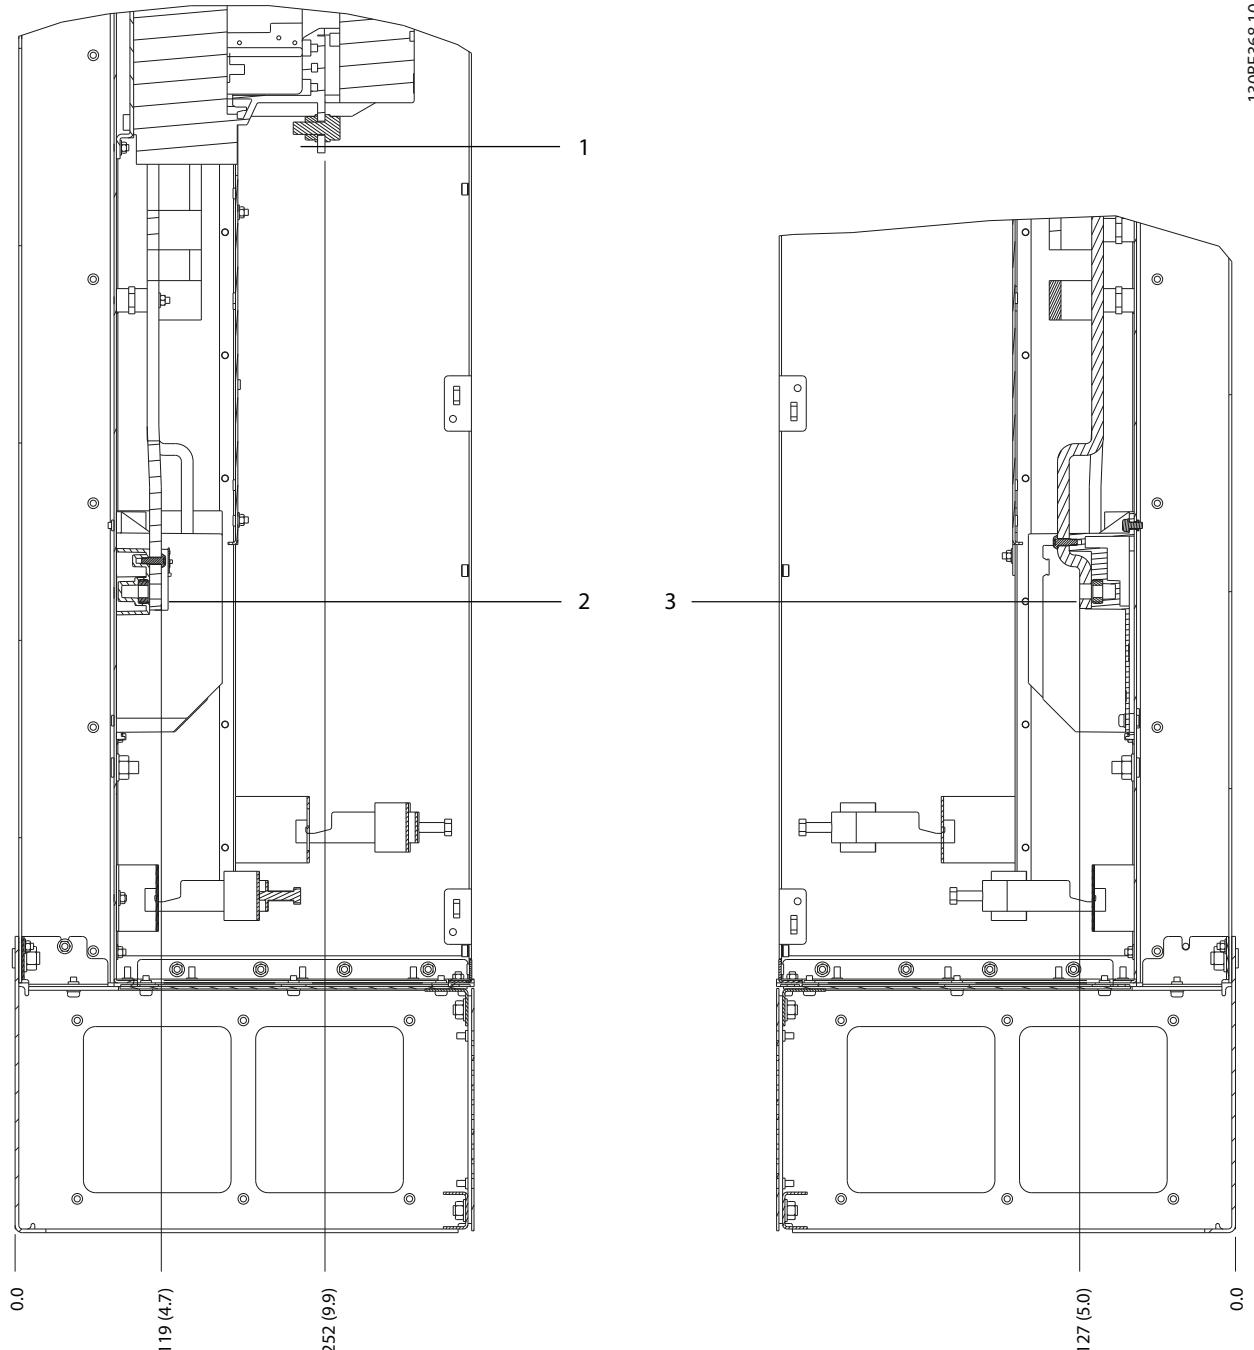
D7h Terminal Dimensions with Brake Option (Side Views)
